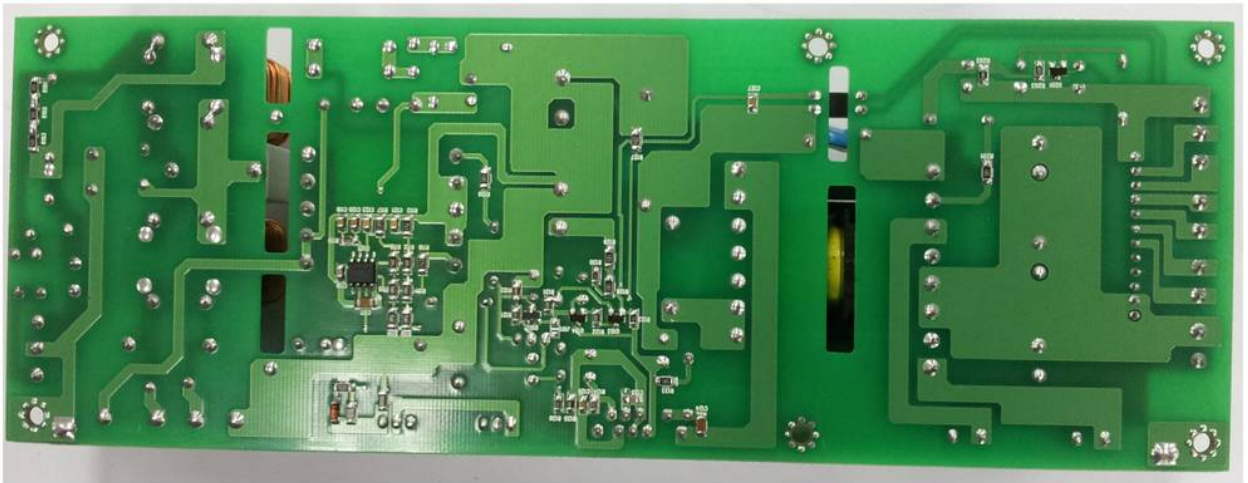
Bottom Views (Dimensions: 225 mm (L) x 80 mm (W) x 43 mm (H))
